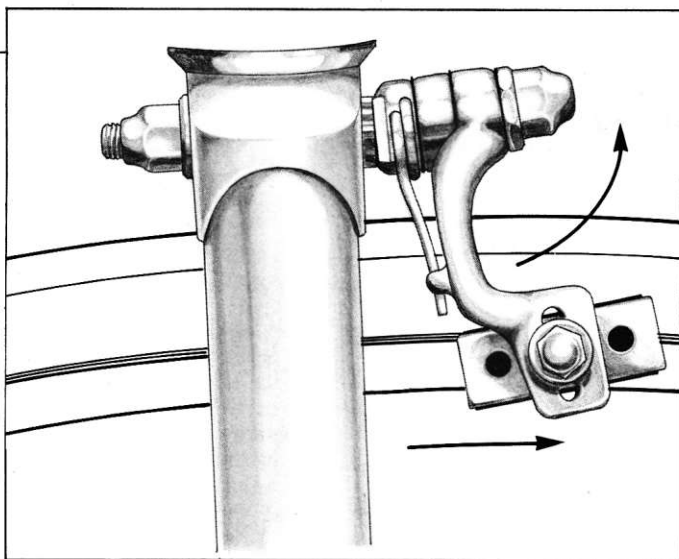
Thin mounting bolts bend outboard of the frame when the pads tug on the rotating rim.
